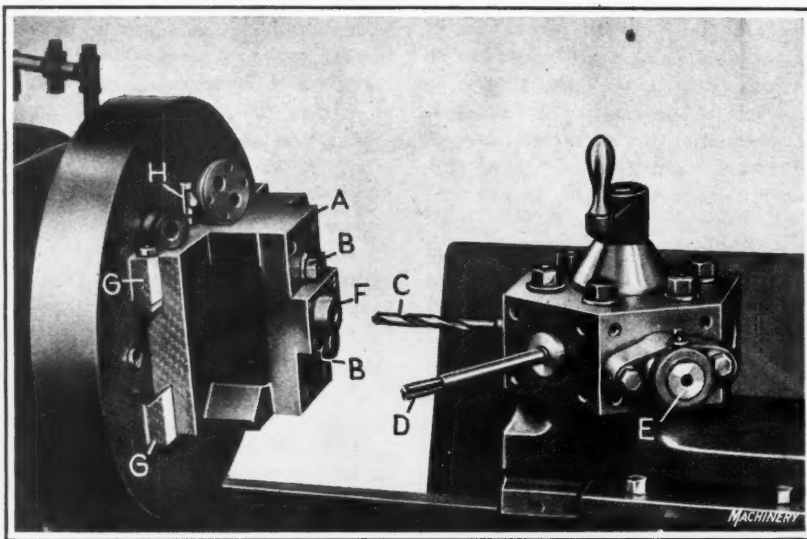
Indexing Turret Lathe Fixture used for drilling and reaming Two Eccentric Holes in Oil-pump Covers
